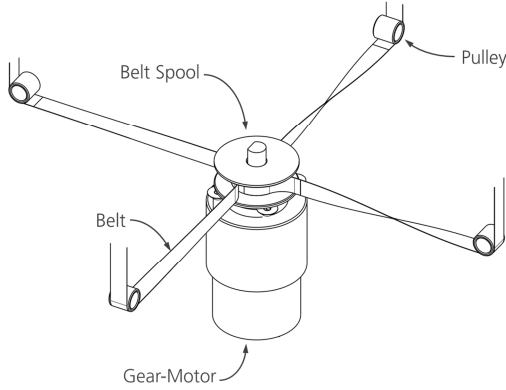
Drive Mechanism based on four tension-belts with main components.
